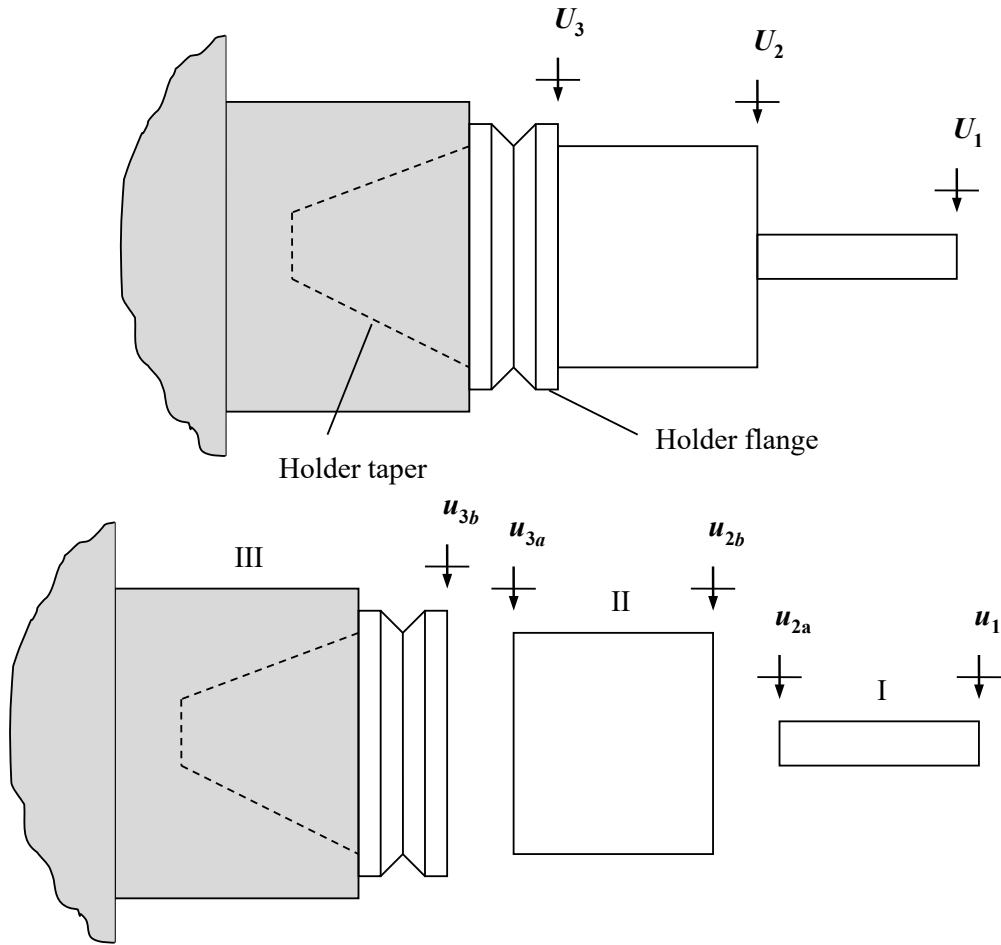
Three-component RCSEA model with the spindle-machine identified as component III. (Top) assembly. (Bottom) components.
